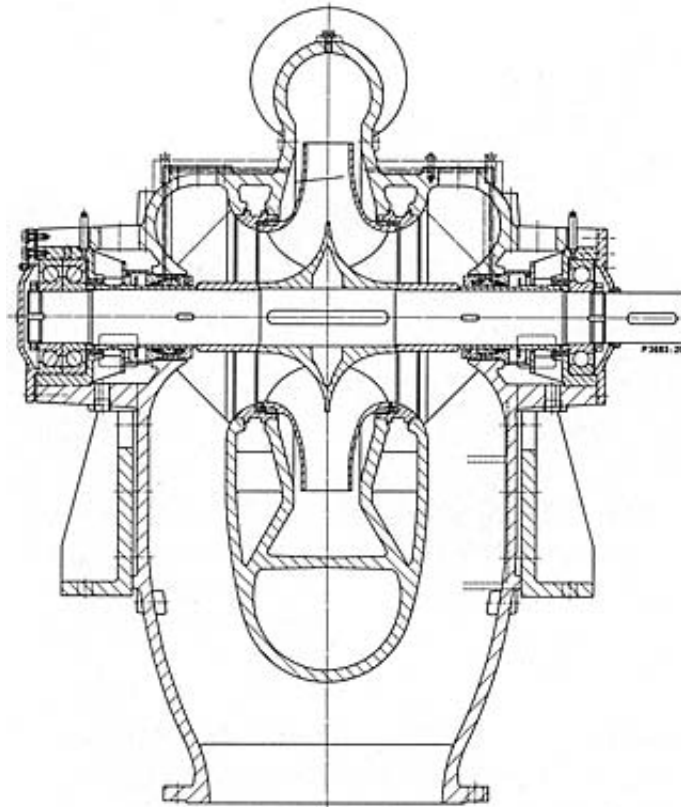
Horizontal, axially split casing, double suction volute casing pump with radial impeller
